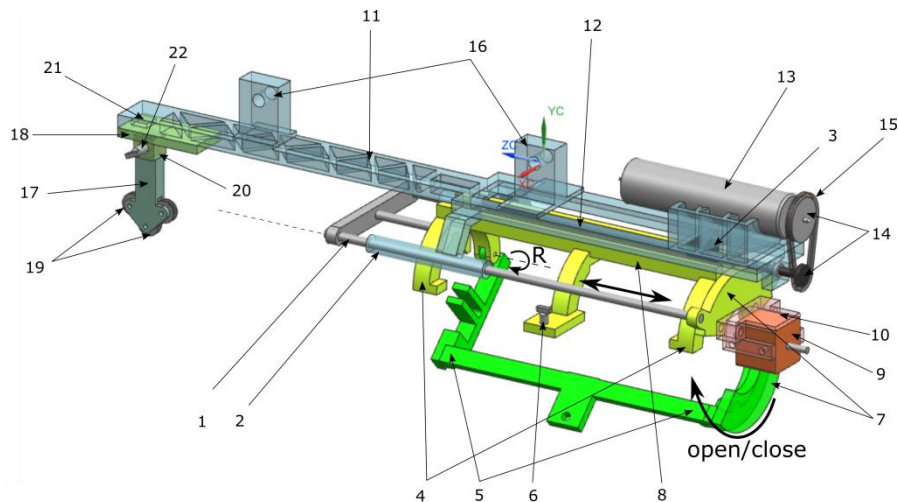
CAD design of the needle insertion module with its highlighted components.
